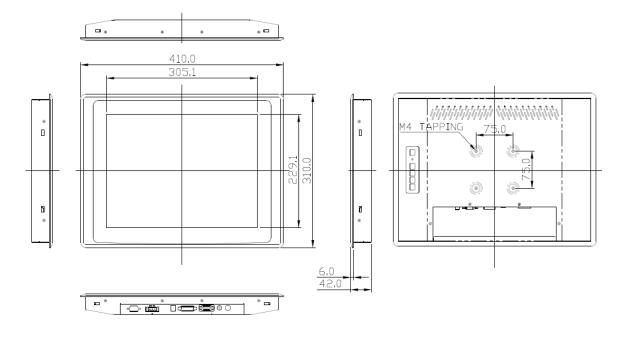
Dimensions of rear side OSD ADP-1158P
